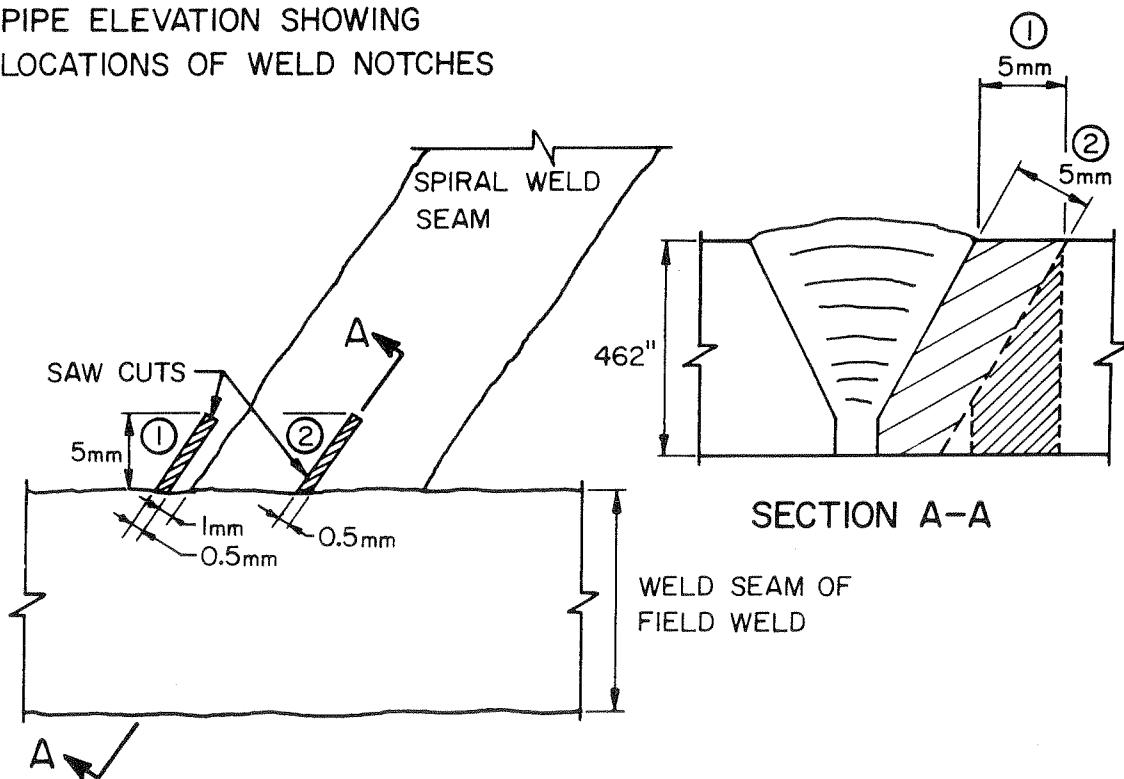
DETAIL OF INTENTIONALLY INDUCED WELD
